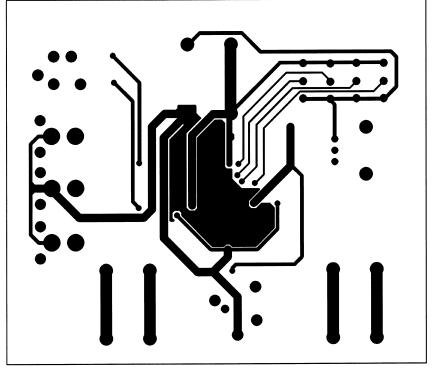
Recommended LQ PC Board Layout: Upper Inner-Layer Layout
